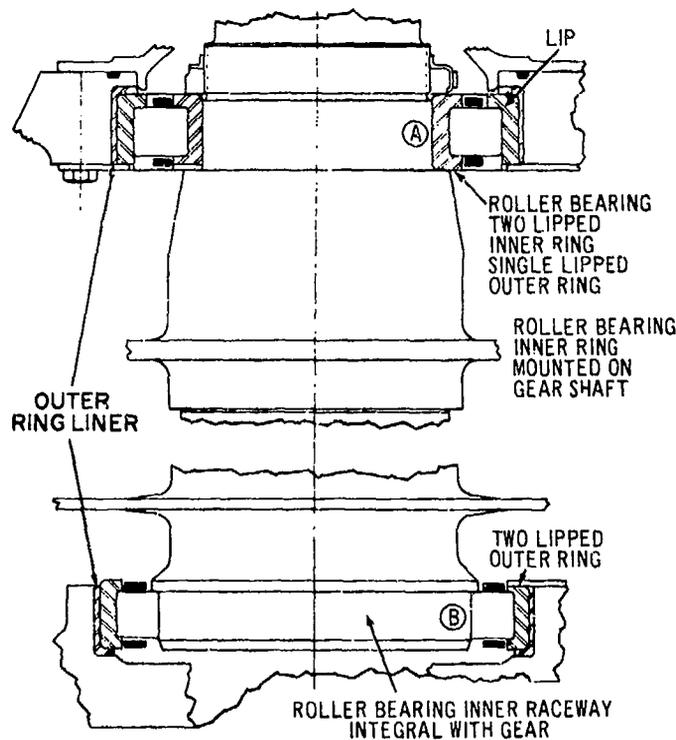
Roller-roller Combination Supporting Straight Spur Gears
